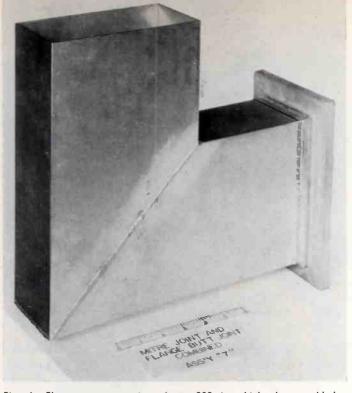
Flange rear extension about .080 in. thick; butt welded.
